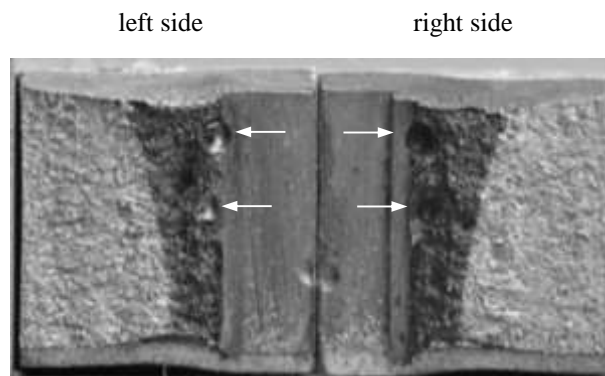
Fracture surface for specimen WP2-03 clearly showing the presence of natural weld defects in the zone of ductile crack extension (indicated by white arrow signs)
